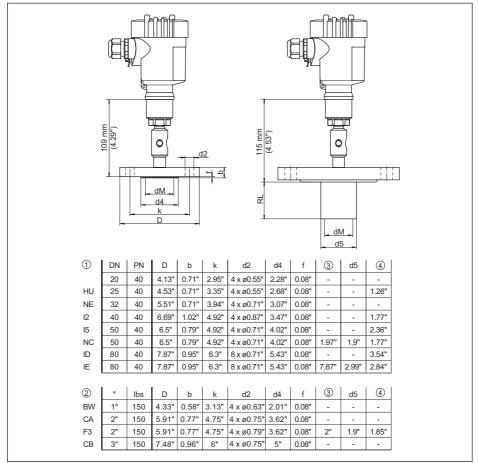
VEGABAR 81, flange connection, dimensions in inch
